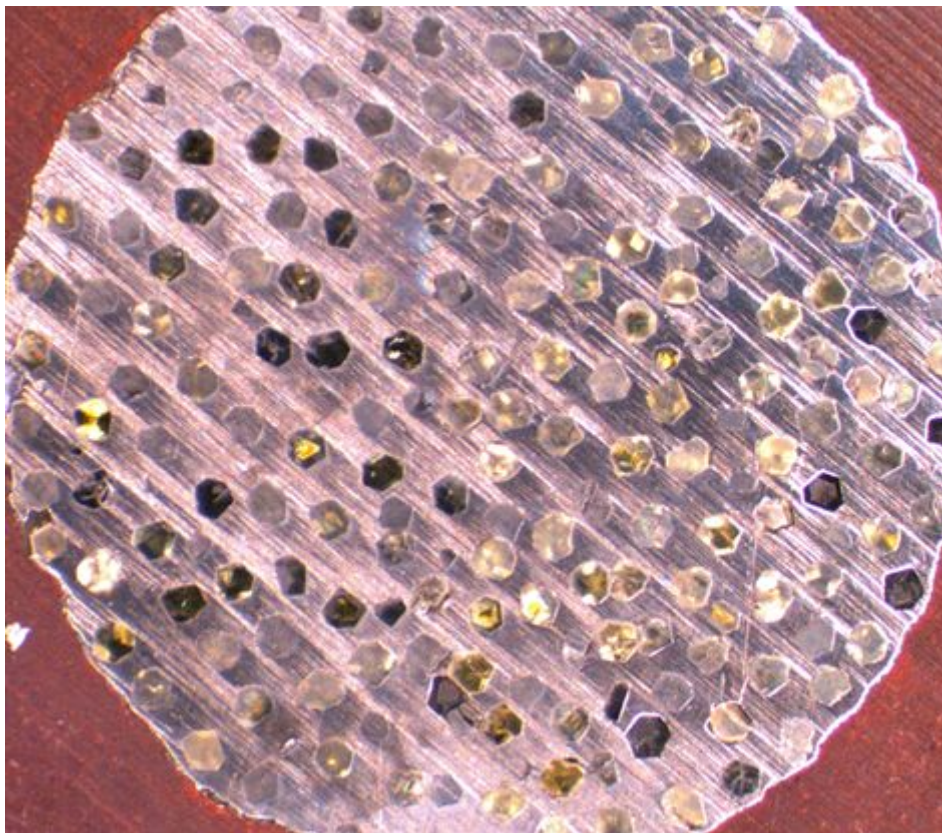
Photo shows the horizontal cross-section of an SD-SP STM insert.
